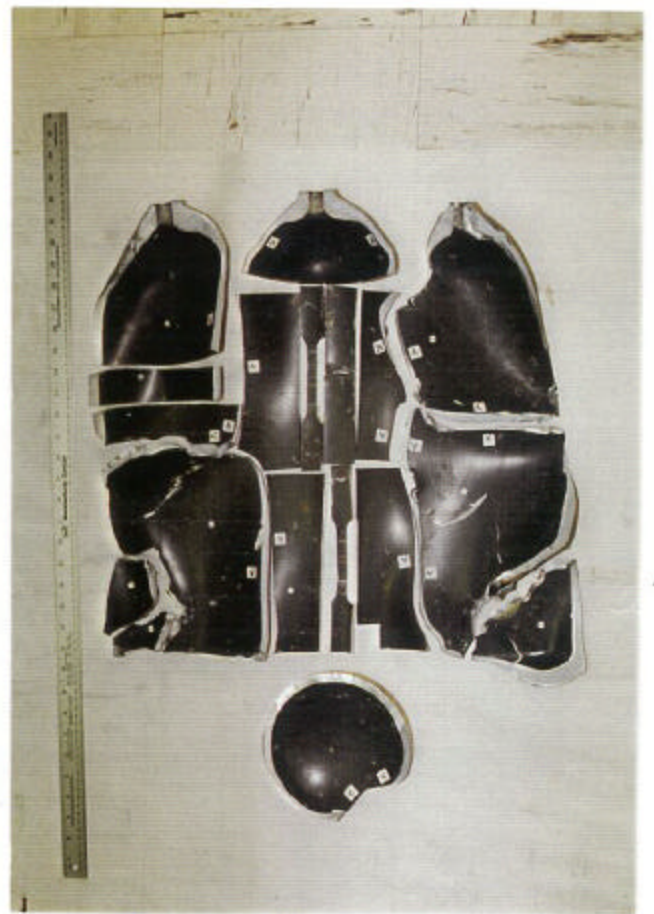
Major pieces of exploded air pressurized (SCUBA) cylinder E6498-2216. Caret marks indicate clearly defined chevron patterns that point to the fracture origins.
